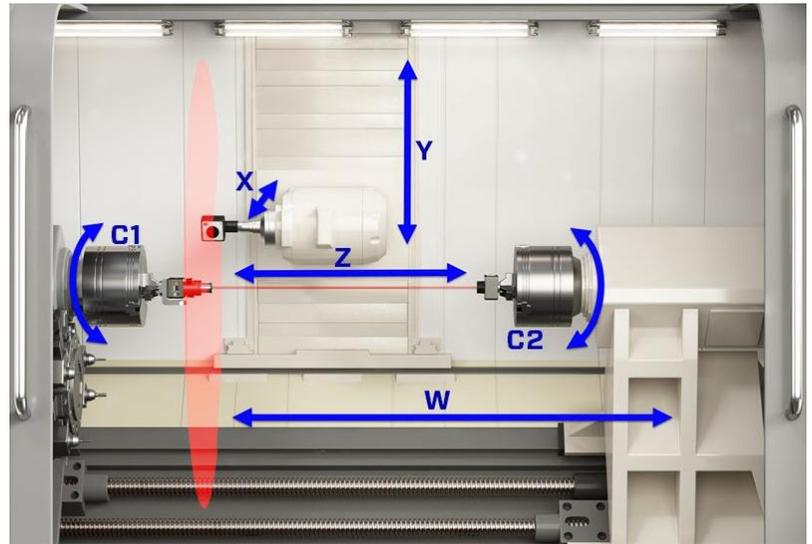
L-702SP 4-Axis Spindle & Multi-Turn Machine
